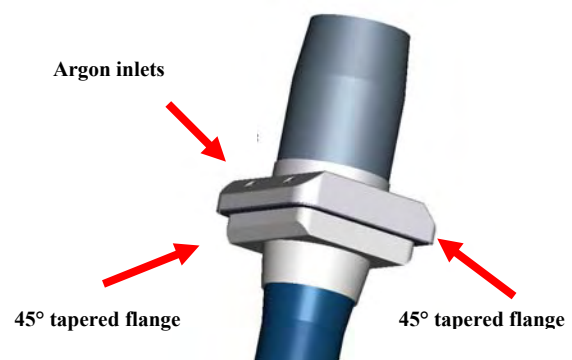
Monobloc inner nozzle plate and monobloc submerged entry nozzle design
